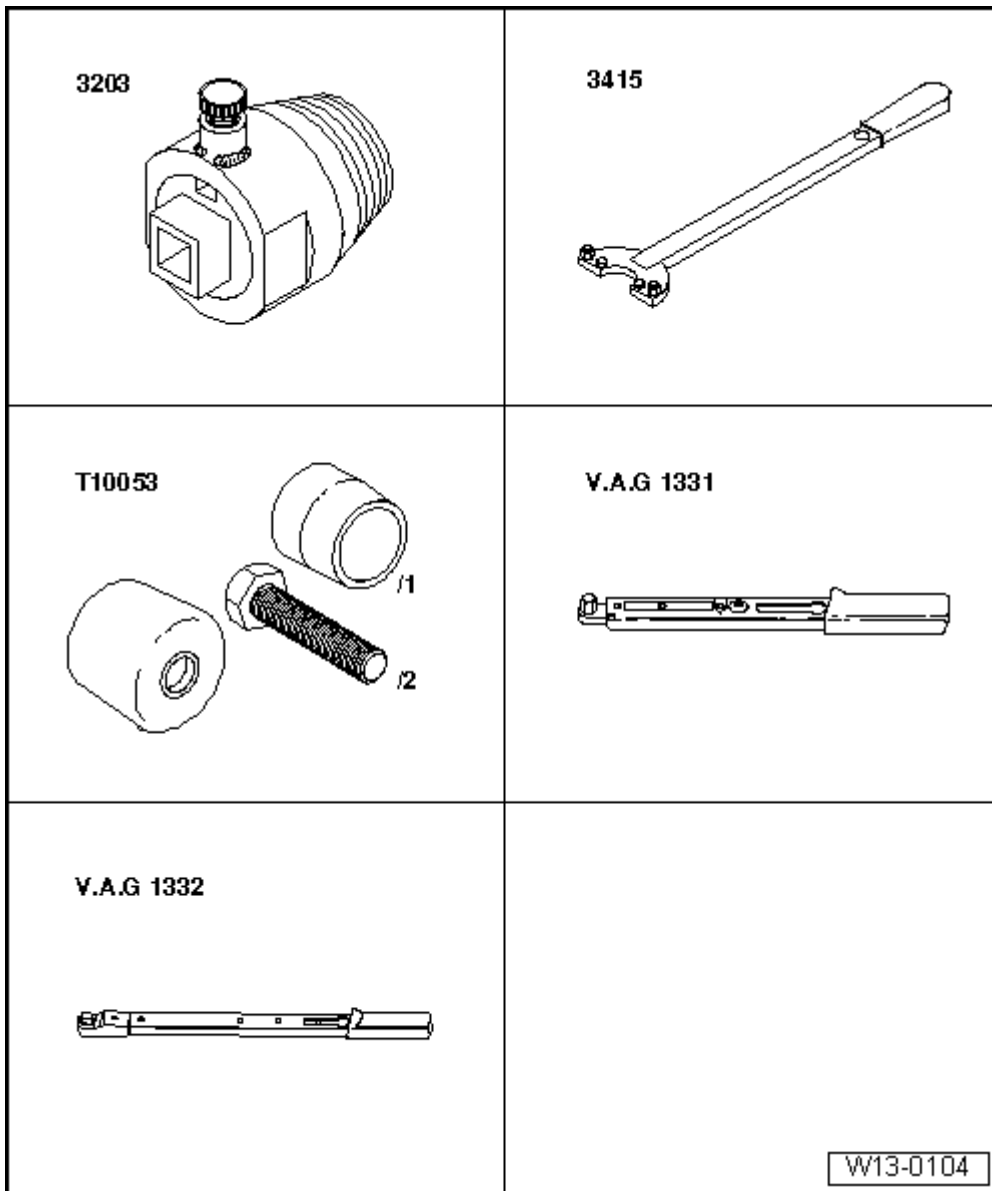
Identifying Special Tools -- Crankshaft Seal, Ribbed Belt Side, Replacing
